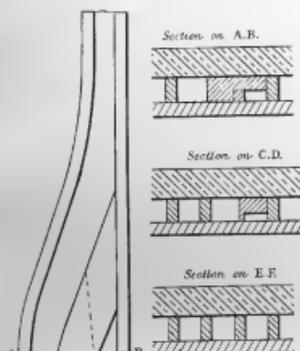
Sections through the Pulsometer distributing machine channels.
